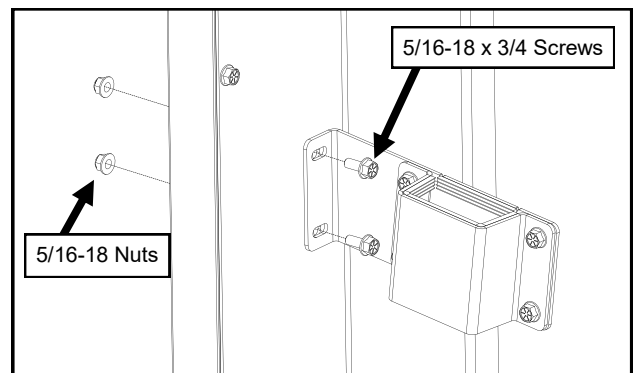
(Rear Leg to ROPS Bracket Fasteners)
